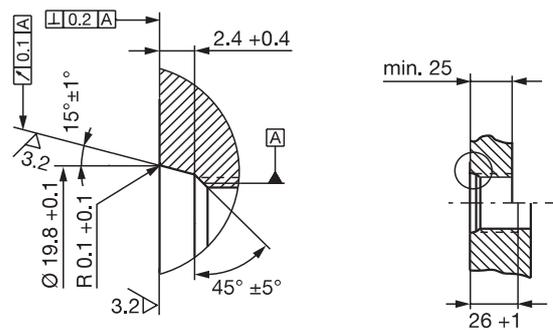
Mounting hole M18x1.5 per ISO 6149 O-ring 15.4x2.1
